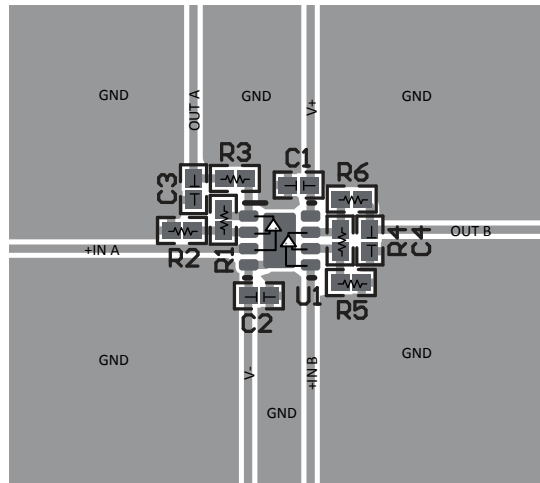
Example Layout for WSON-8 (DSG) Package
